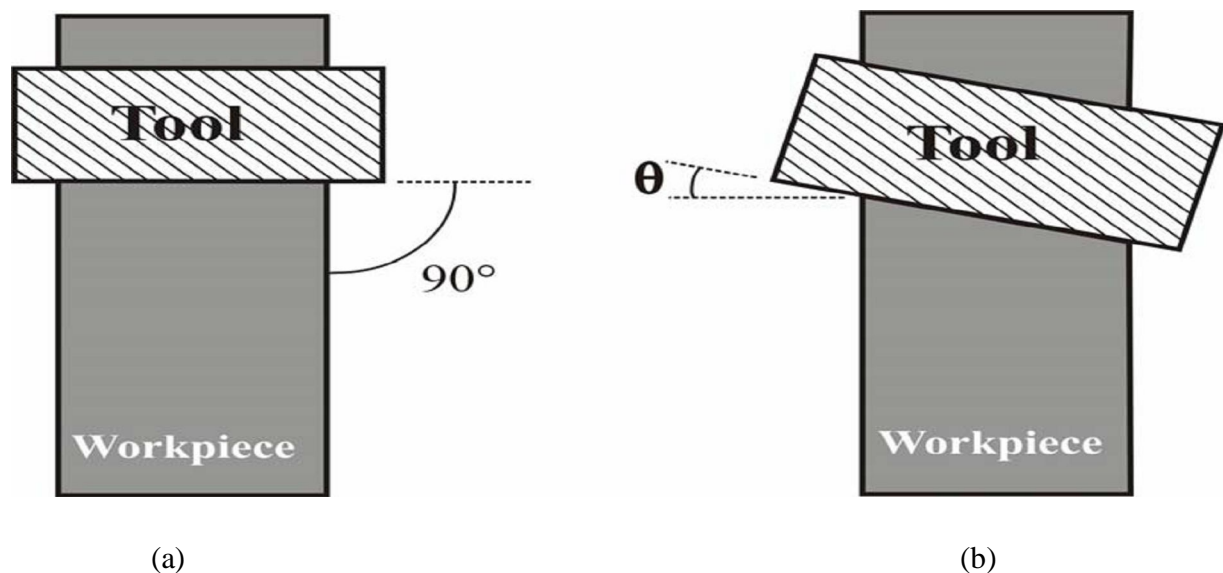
(a) Orthogonal cutting (b) Oblique cutting
